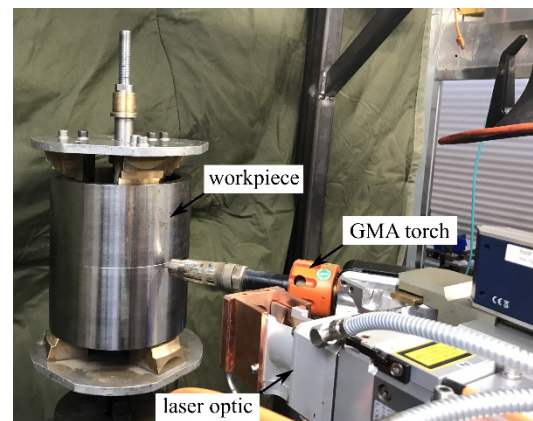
Experimental setup for hybrid laser-arc welding (HLAW) of circumferential welds in 2G-position
